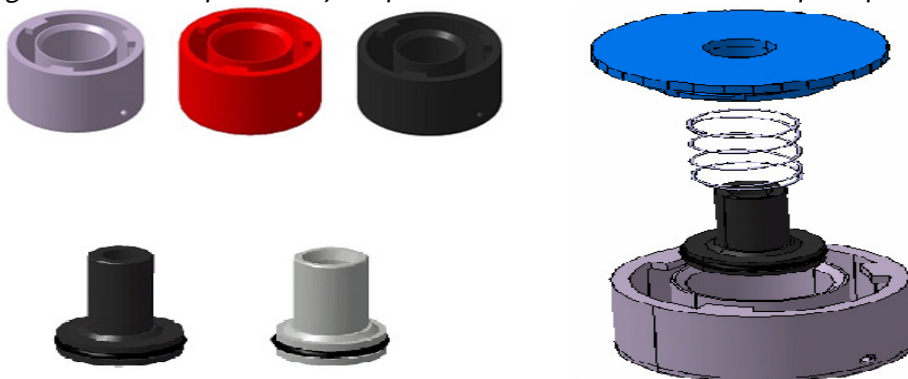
Set of parts integrating the piece intended to be flowing through the IMC
